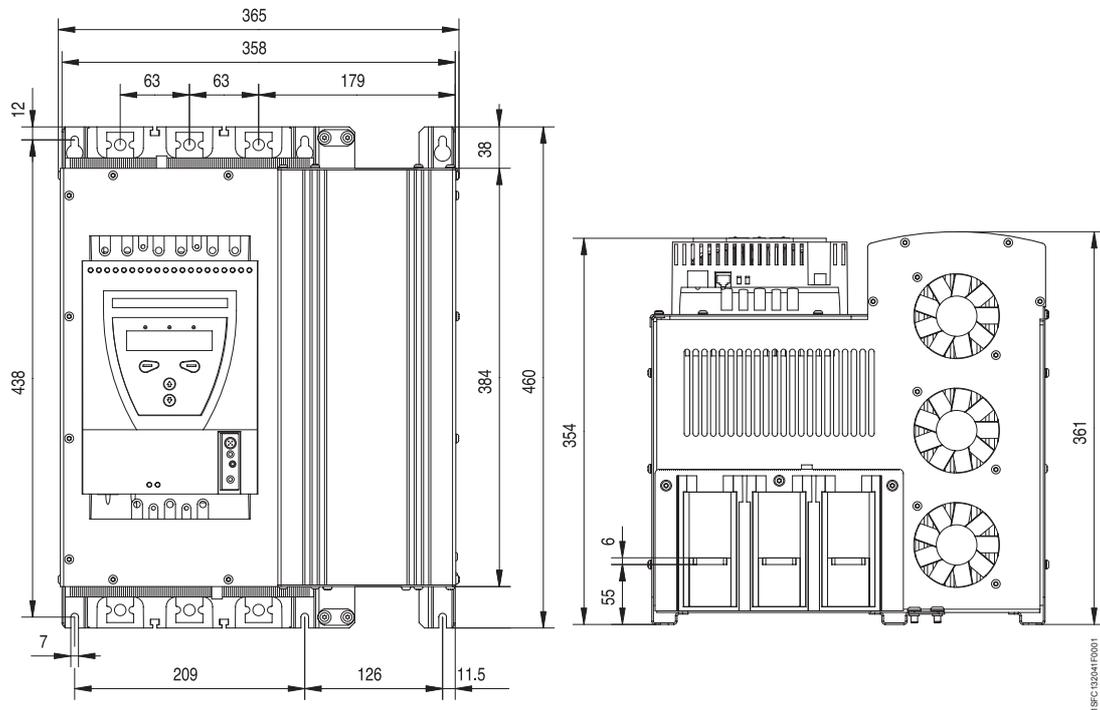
Dimensions PSTB370...470 (mm) (1 mm = 0.0394 in)
